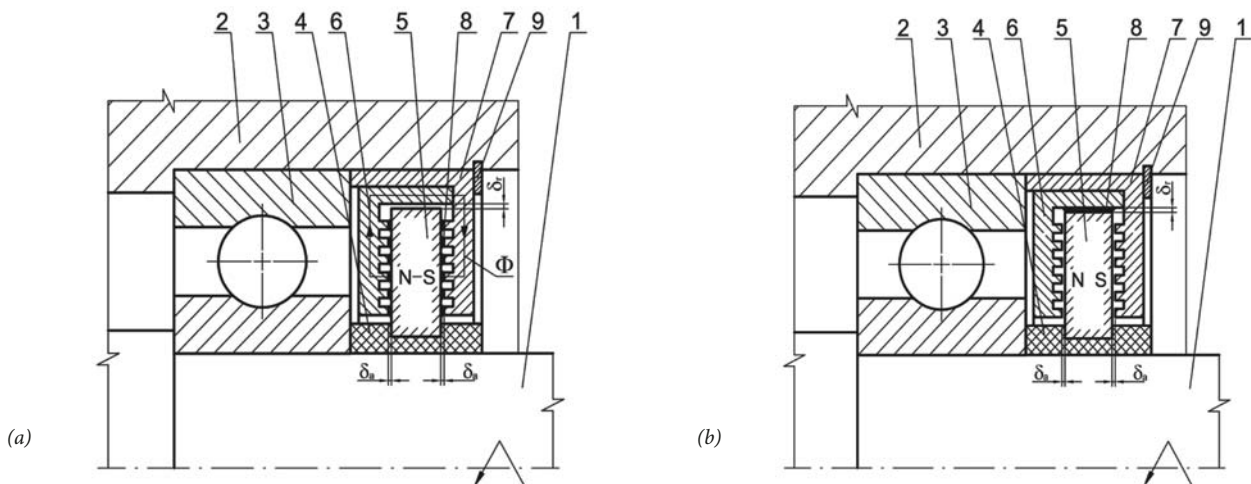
Compact centrifugal seal with magnetic fluid for rolling bearing (a) position of magnetic fluid at low rotating speed, (b) position of magnetic fluid at high rotating speed 1 - shaft, 2 - housing, 3 - rolling bearing, 4 - sleeve, 5 - annular permanent magnet, 6 - inner pole piece, 7 - outer pole piece, 8 - magnetic fluid, δ_a - axial sealing gap, δ_r - radial sealing gap, Φ - closed magnetic circuit
